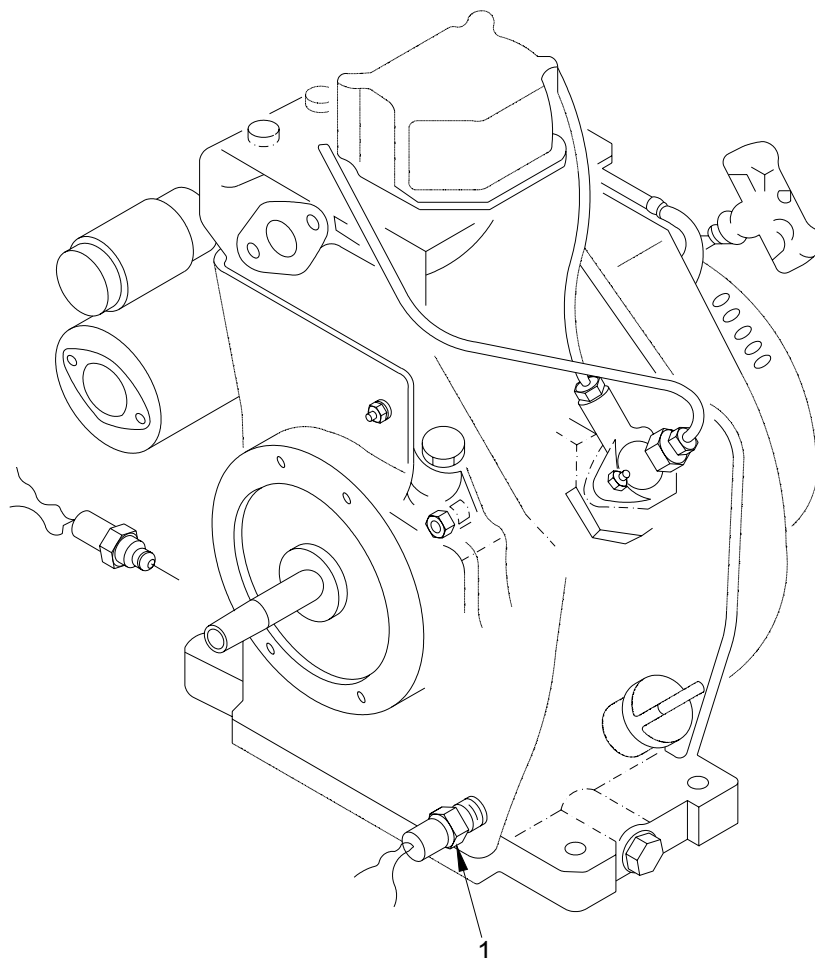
LUBRICATION SYSTEM/OIL DRAIN ASSEMBLY
